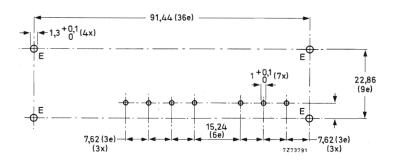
Piercing diagram viewed from solder side of board: e = 2,54 mm (0,1 in).
